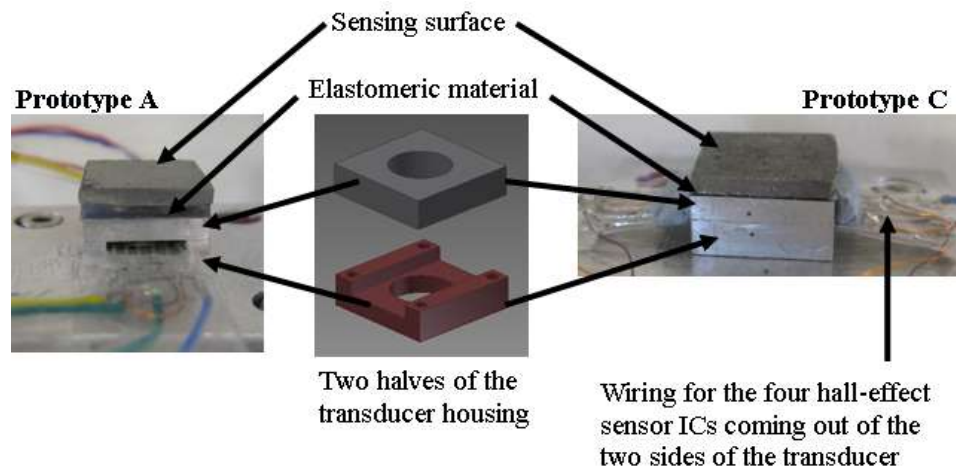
The completed magnetic load transducer Prototypes A and C. The sensing surface was made of steel plate and the two halves of the transducer housing were made of aluminium and were secured with fixing screws.
